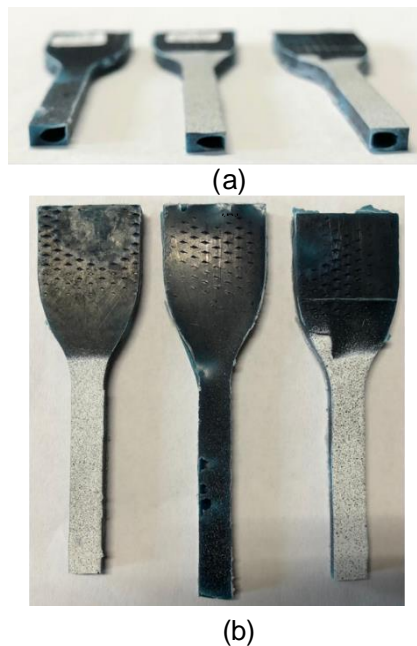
Fracture of three 75% rPP – 25% vPP mixture test specimens: (a) fracture zone (b) closer detail of the specimens
